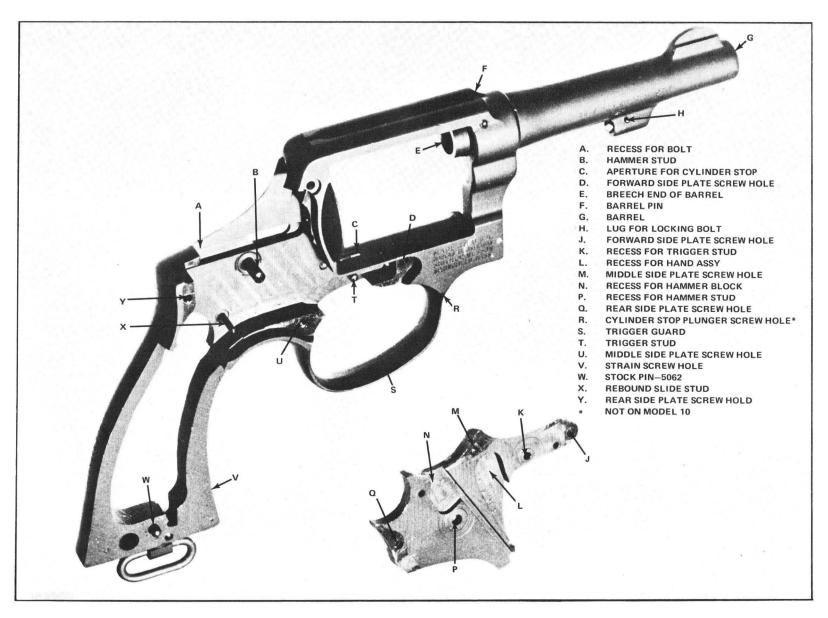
Frame, Barrel, and Side Plate Inspection Points and Areas
